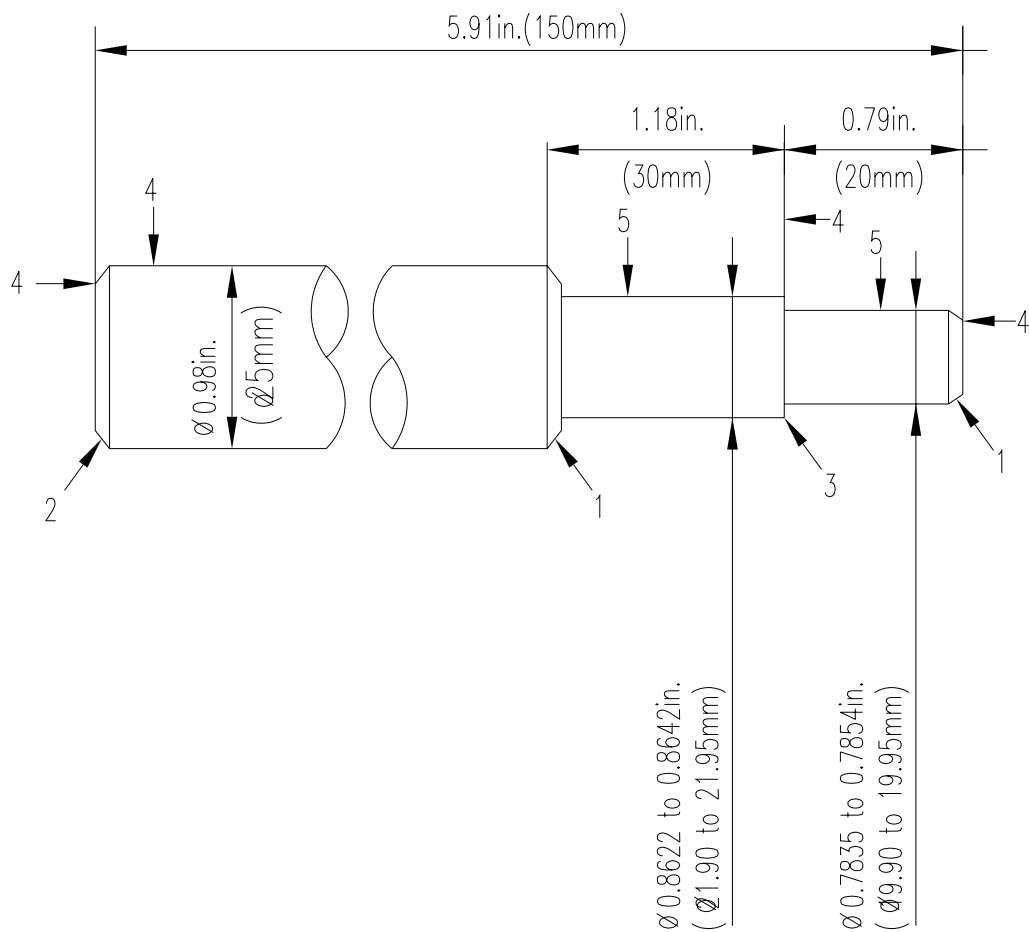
Connecting Rod Small End Bushing Replacing Tool
